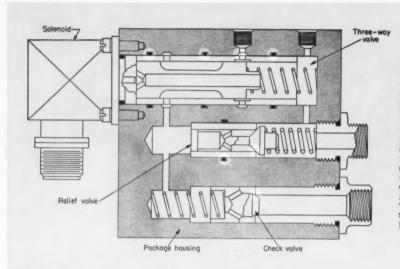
In the multiple-valve packaging technique, parts making upeach separate valve are assembled in a single body. This arrangement is particularly suited for use where units to be packaged are few and simple. Maintenance and test of the multiple-valve assembly are difficult since leakage from the common return port gives no clue as to which valve is faulty. Circles show potential leak points.
